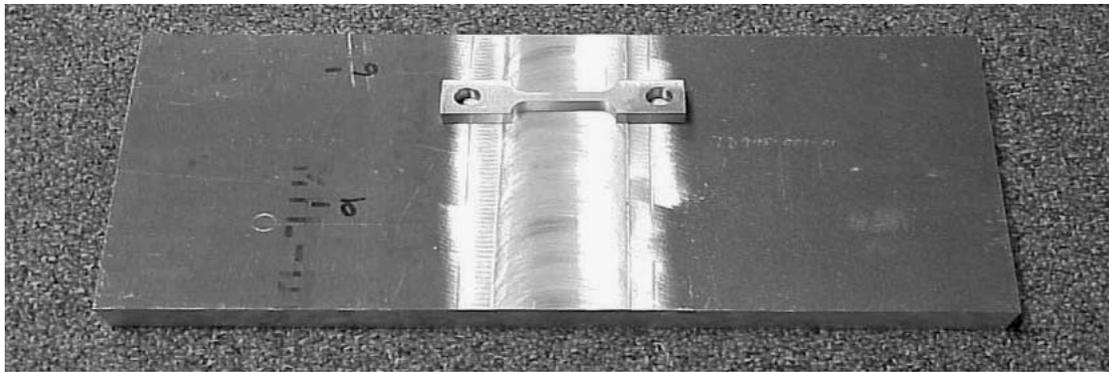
FS weldment SCC specimen (specimen = 89 mm [3.5 in.] length)
